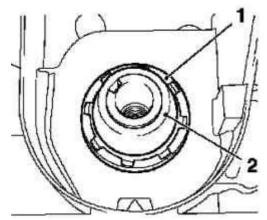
Install the seal ring of the crankshaft and a protective sleeve: 1 - O-ring of the crankshaft 2 - protective sleeve
